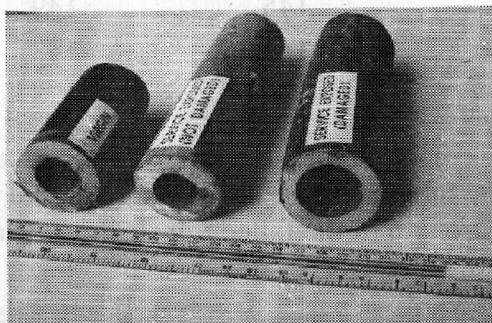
Virgin, undamaged and failed final superheater tubes of a 500 MW boiler
